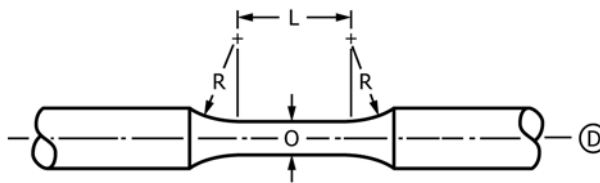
Specimens With Tangentially Blending Fillets Between the Test Section and the Ends
